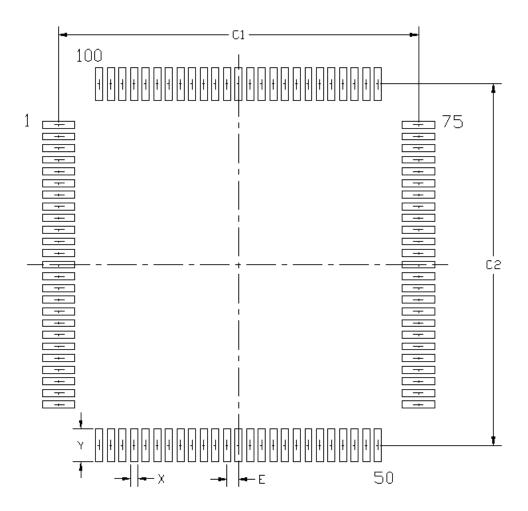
TQFP100 PCB Land Pattern Drawing
